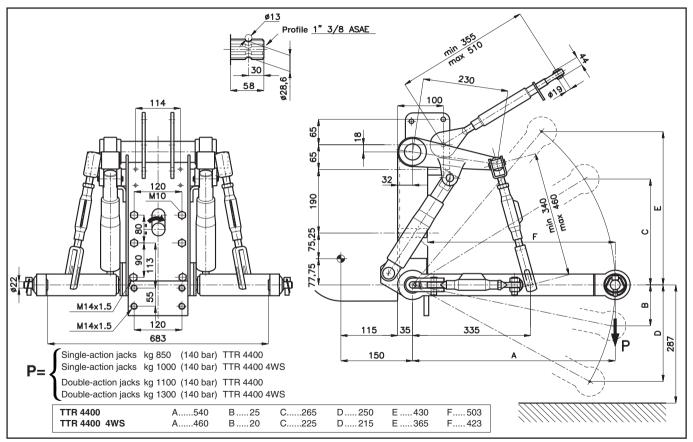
Dimensions of 3-point hitch and PTO flanging, with 6.50 - 16 wheels
